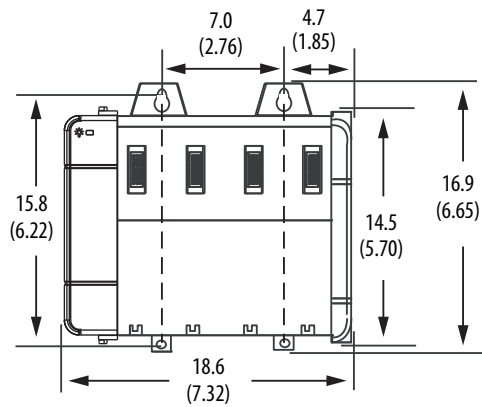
1756-A7/B Chassis and Chassis Adapter Module
